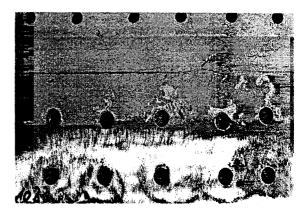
0.015 ins. (0.038 mm) material removed by dressing
